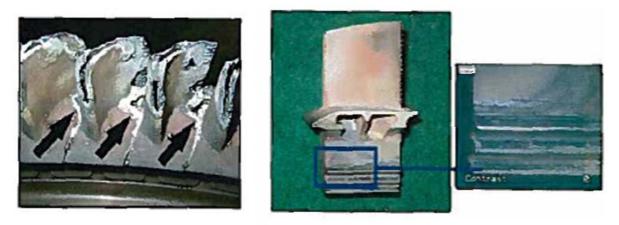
Corrosion/Pitting on a Compressor Blade
